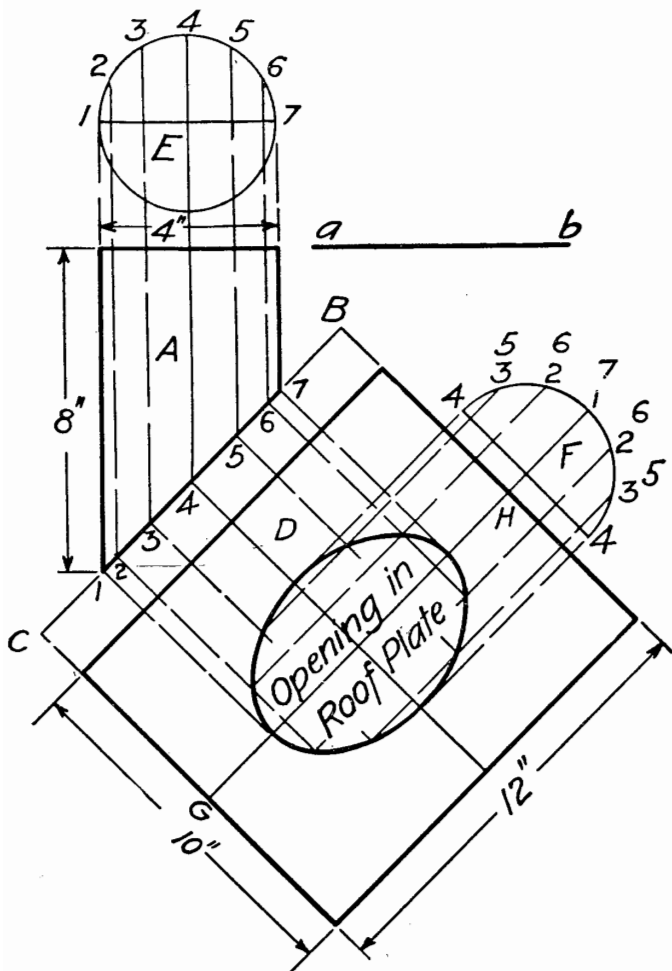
Method of Obtaining Pattern for Pipe and Opening in Roof Plate.
